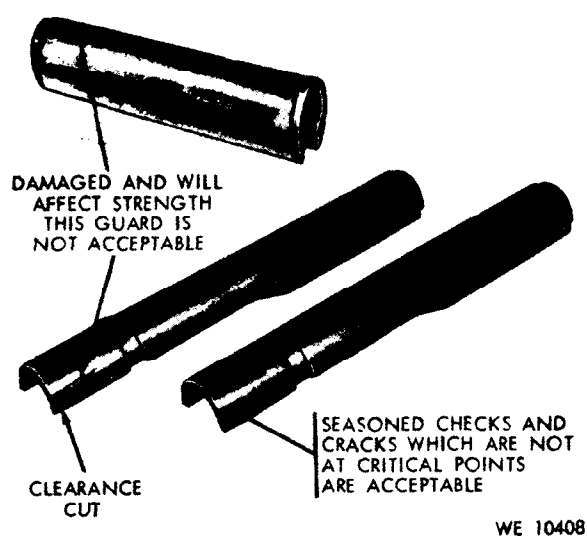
Gun hand guard defects and clearance cut for rifles.
